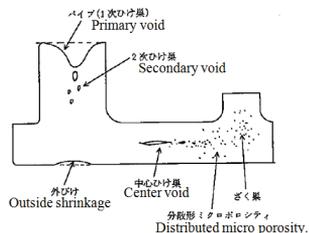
Internal defect in the field of casting metal. ¹⁾
